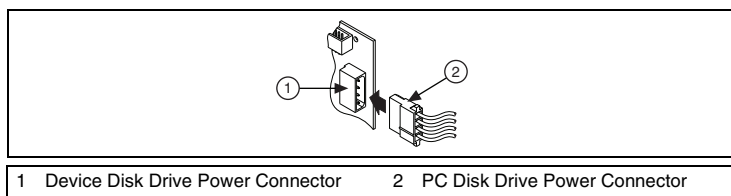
Attaching Disk Drive Power to the PCI Express Device
